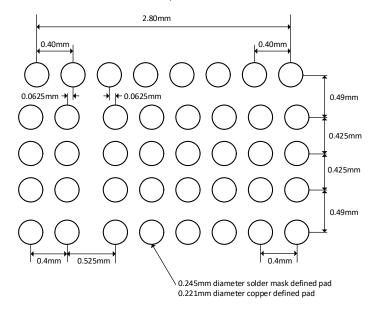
ARC3C0845W 40P WLCSP Recommended PCB Footprint
